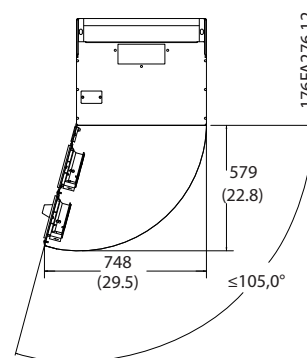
Front Clearance of IP21/IP54 Enclosure Type, Frame Size E1.
